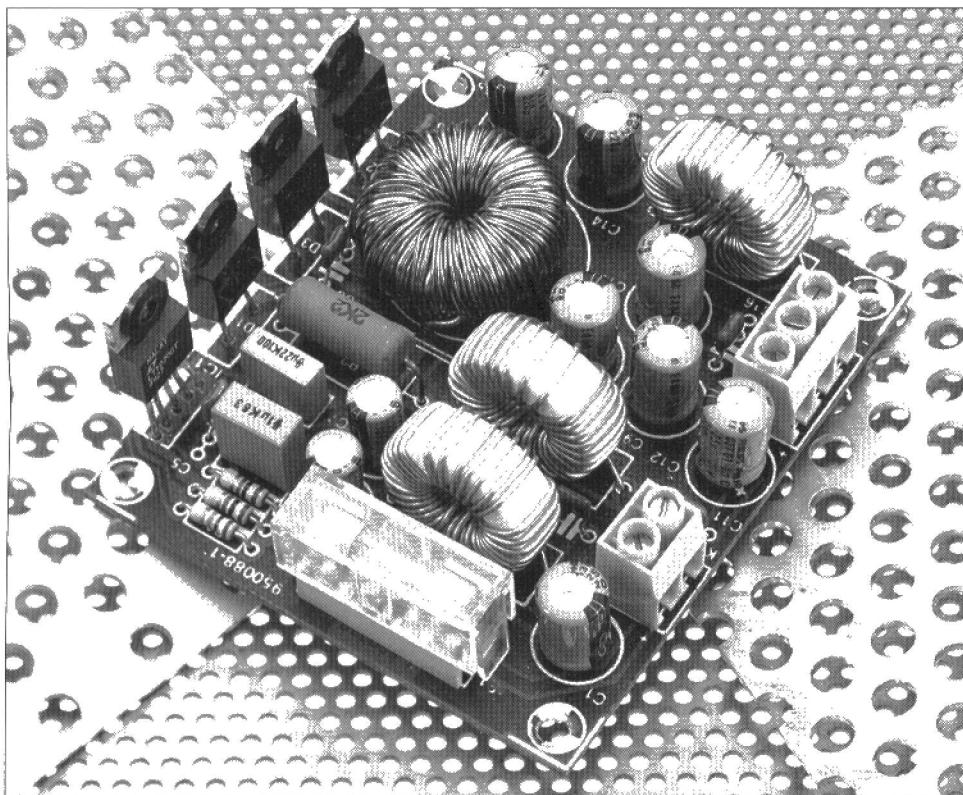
Completed prototype board. Diode D2 should be omitted for the purpose of testing the circuit.
